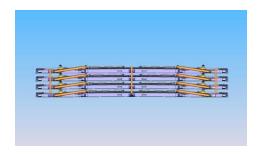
3(18) b. Collapsed stack with three straps (individual brace straps not shown)
